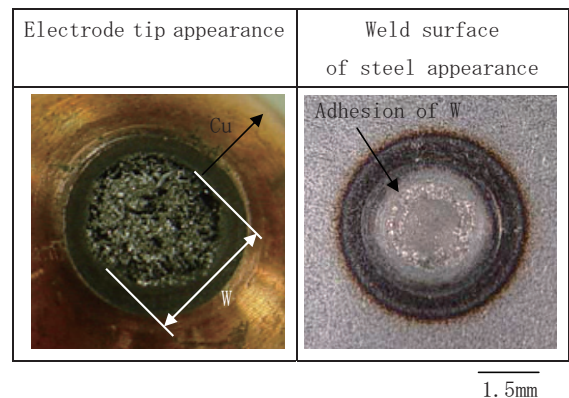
Appearance of W/Cu hybrid electrode tip and the weld surface of cold rolled steel sheet. (After 20 points of weld)
